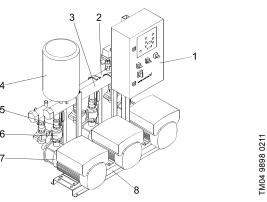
Front view of Hydro MPC CME pump system with three CM(E) pumps
